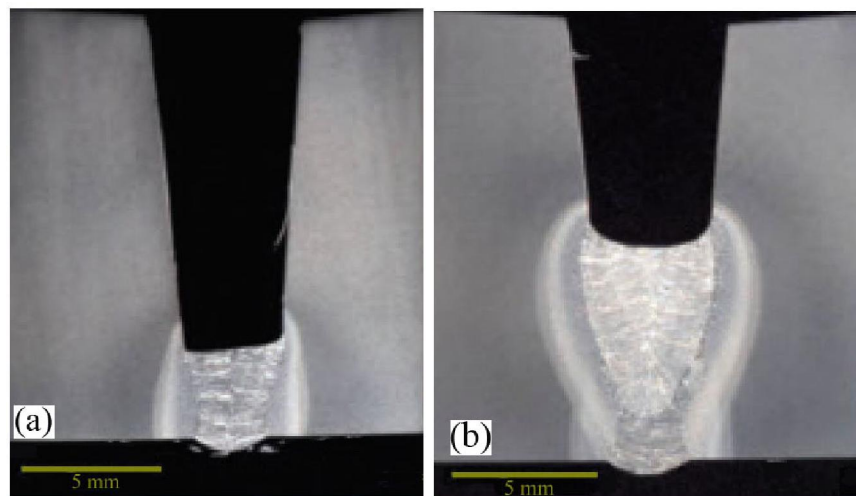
Cross section of hybrid welding at 0.0381 m/s (a) root pass welding (b) root pass plus hot pass welding [12]
